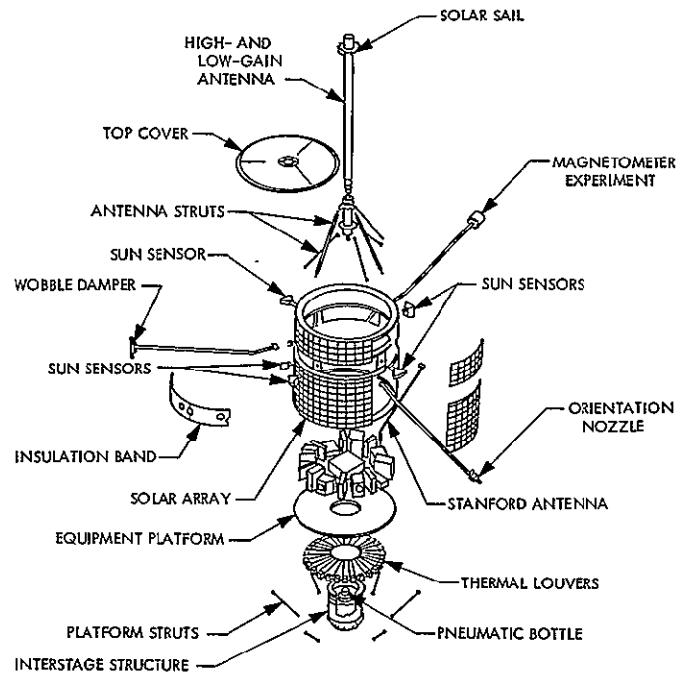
Exploded view of the *Pioneer VII* spacecraft
